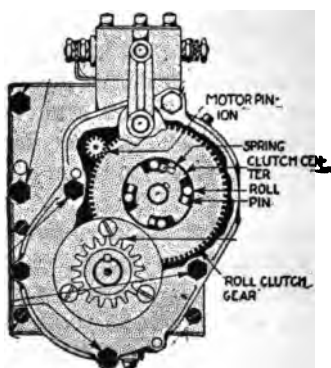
Driving Parts of Lighting Dynamo and Starting Motor.
